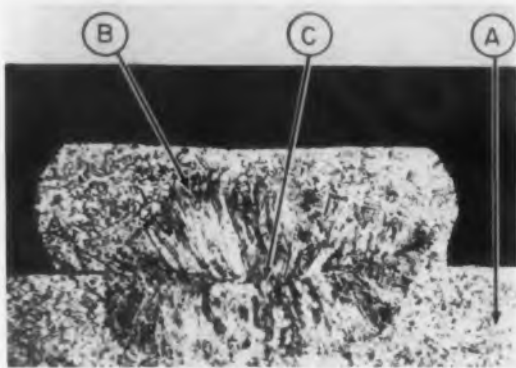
Photomicrograph showing the areas which should be present in a good weld.
